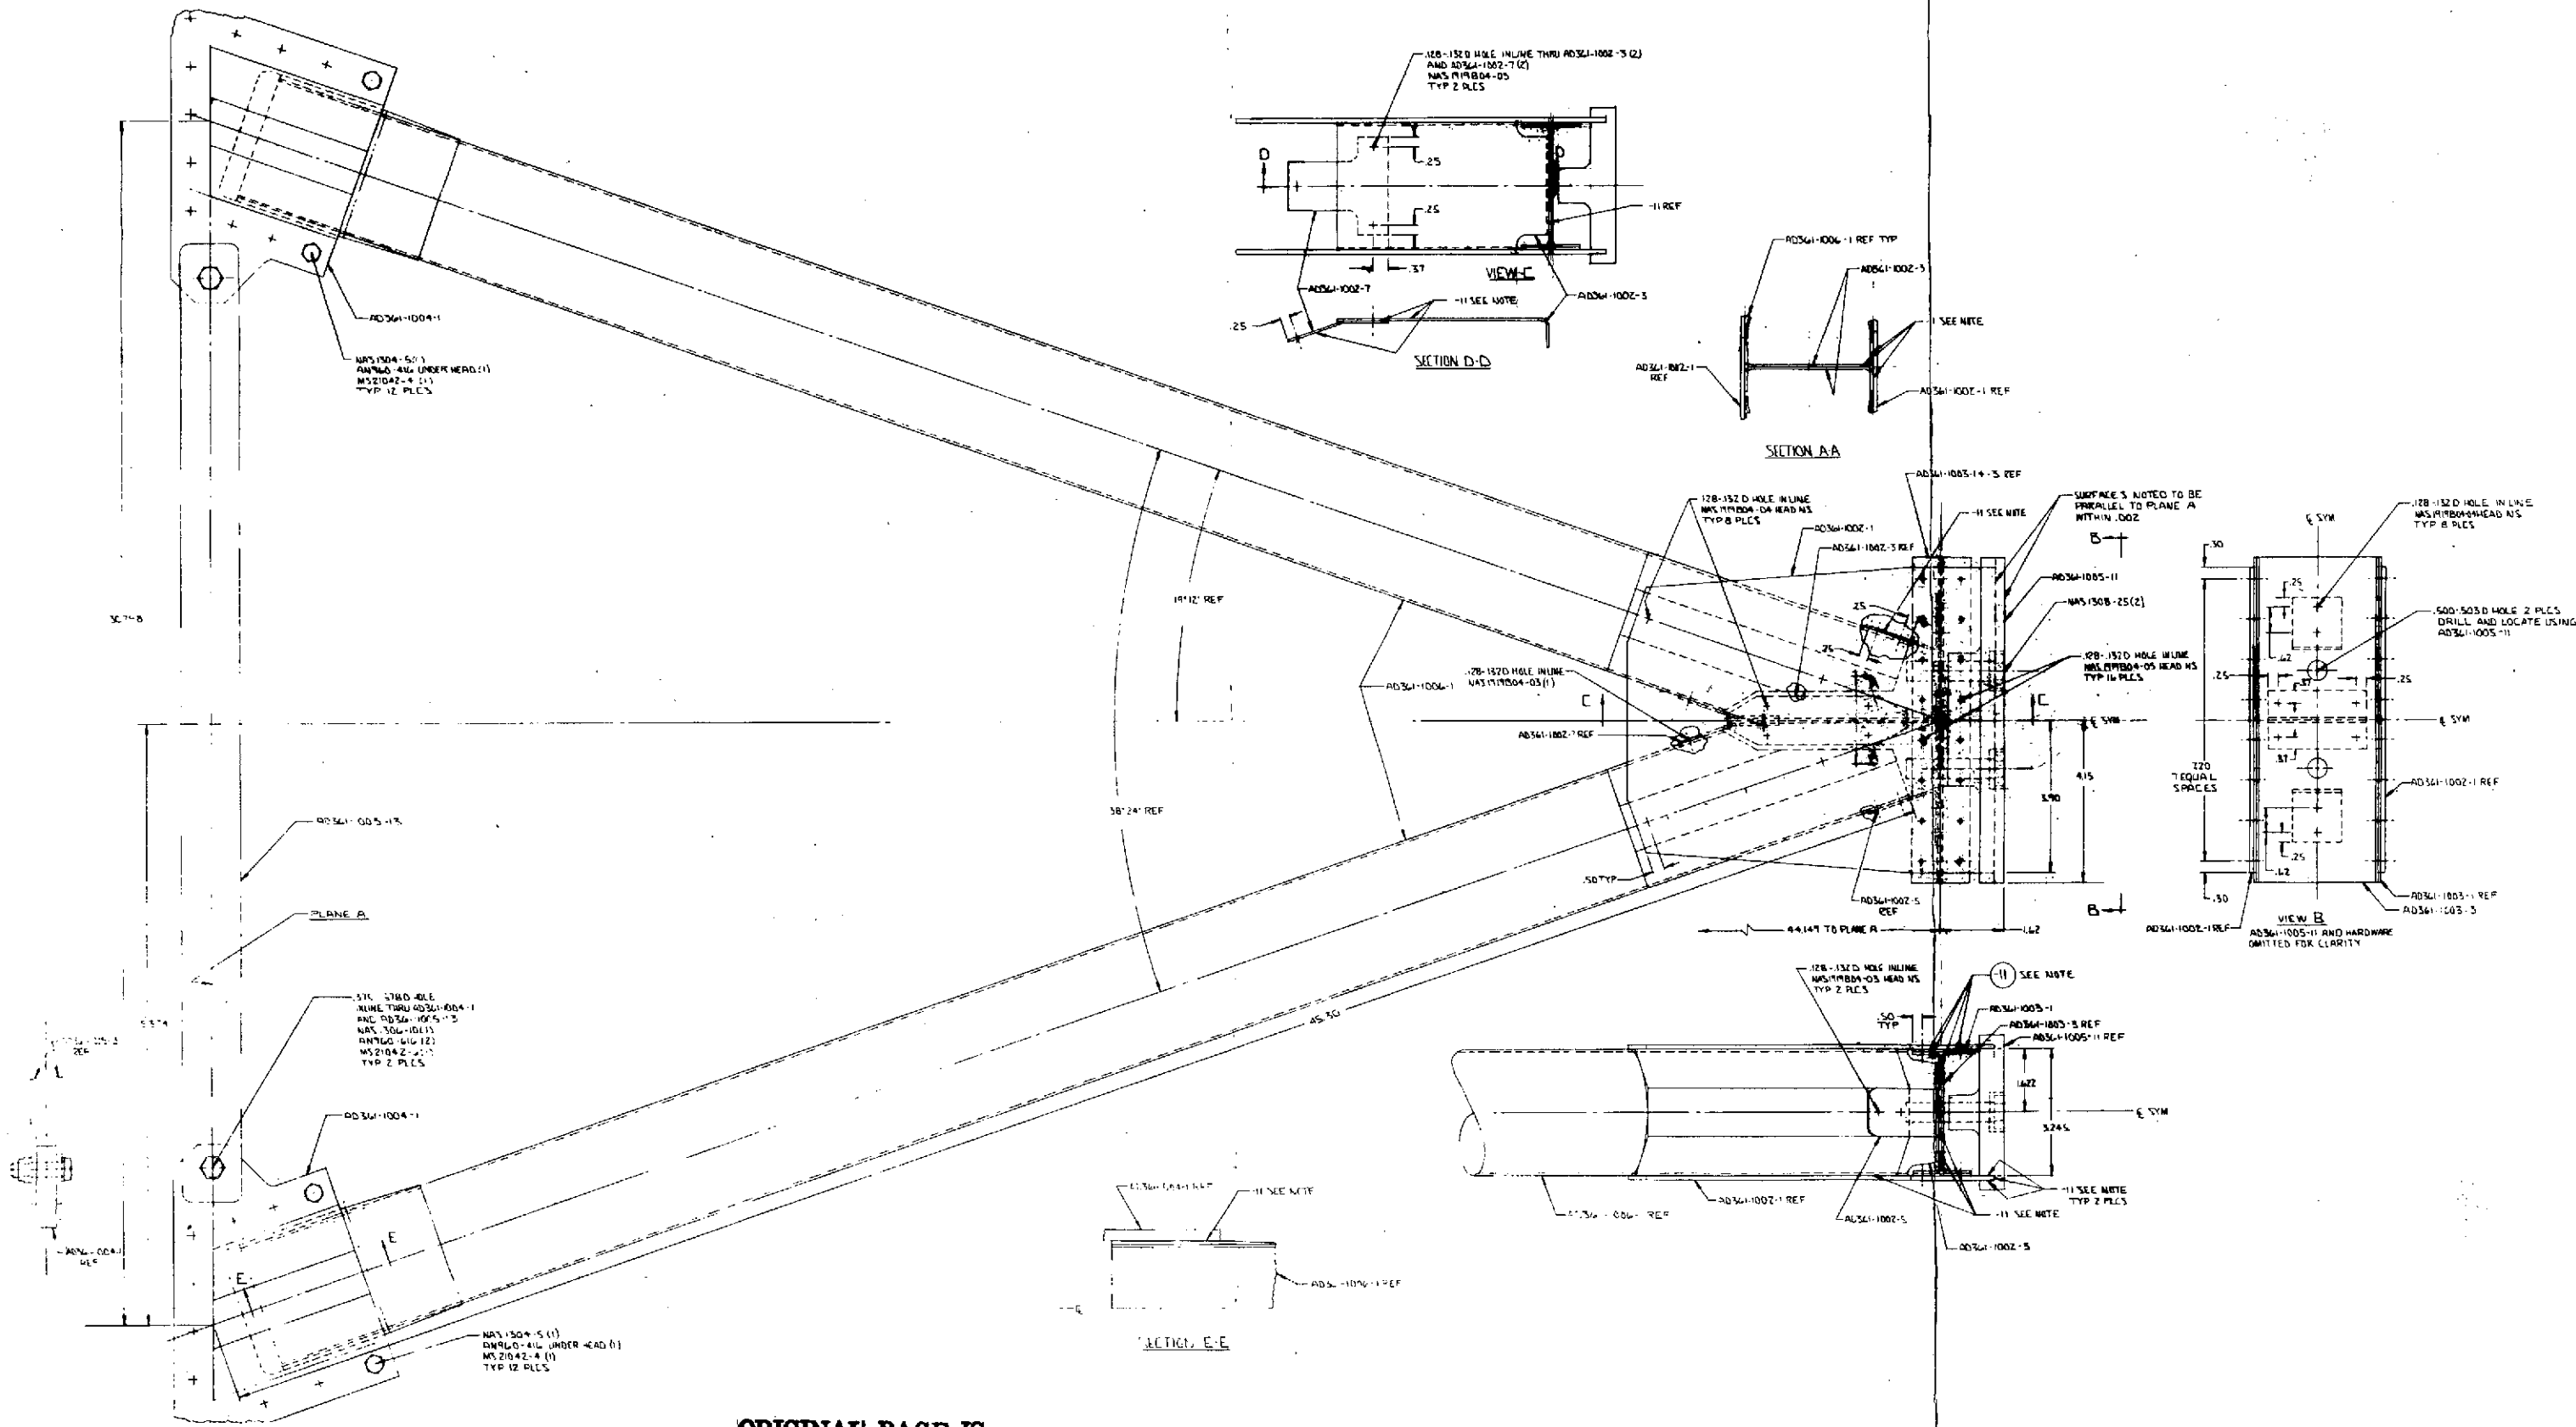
Tube/Apex Fitting Assembly, Upper Ring Intersection
